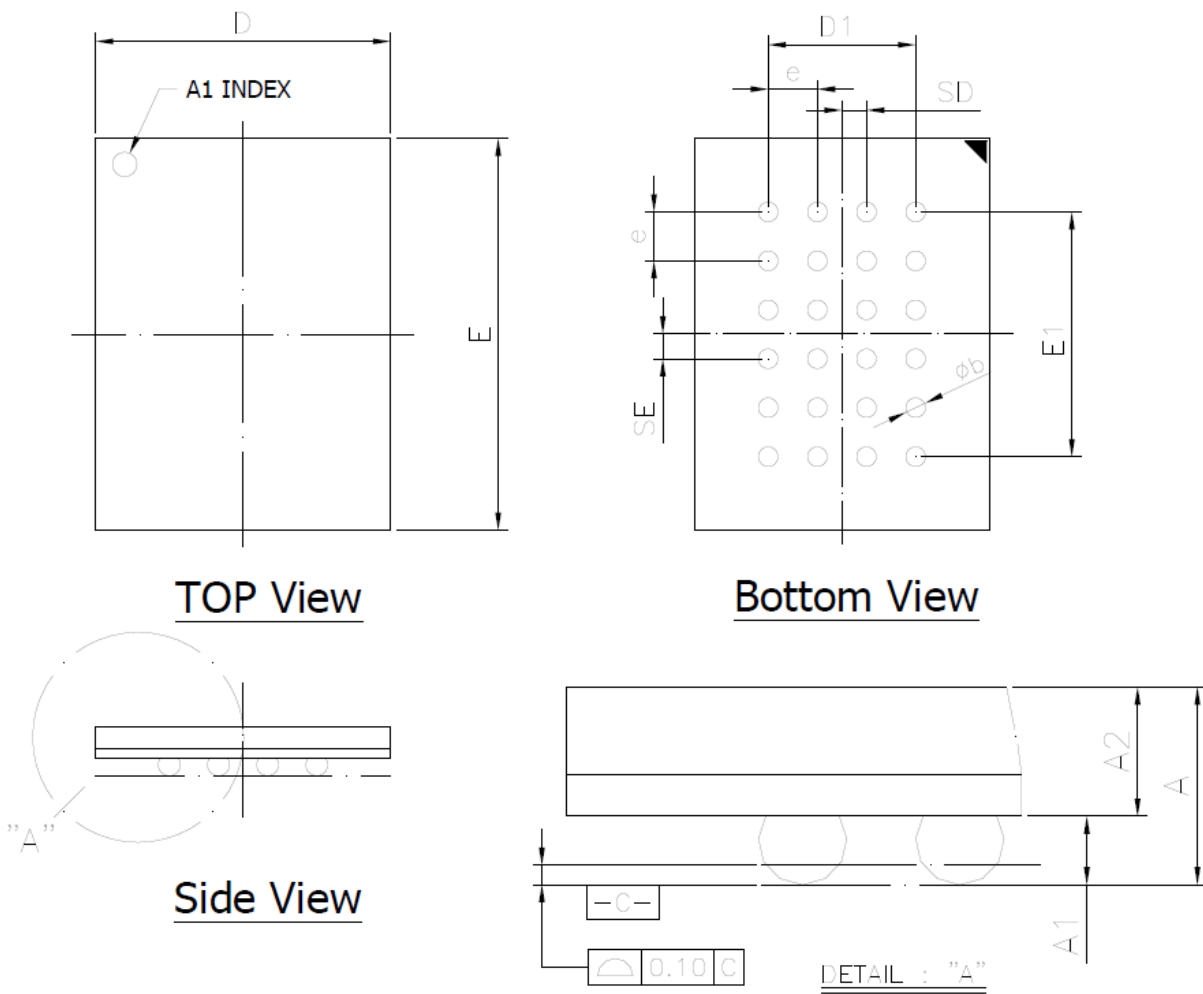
Package Outline Drawing Information for 24-ball TFBGA (ball array 5 x 5-1)
